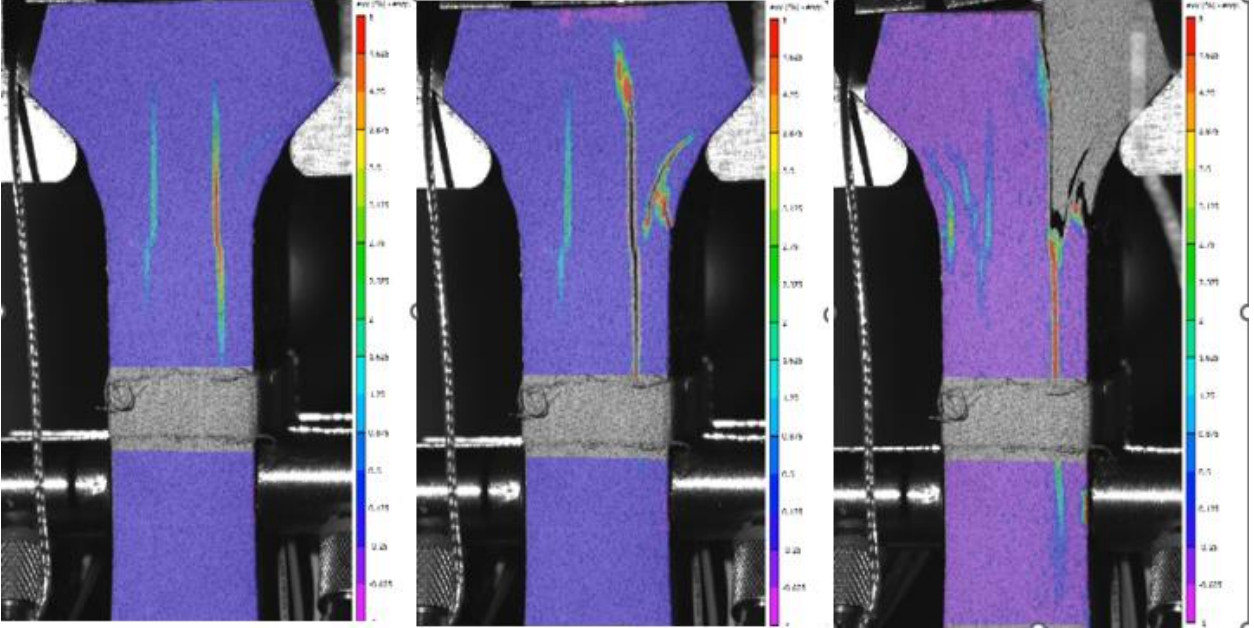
Specimen FW15553, Example of an asymmetric failure when damage propagates along one side of the shank prior to connecting the fillet radius and failing a single tang of the test article.
